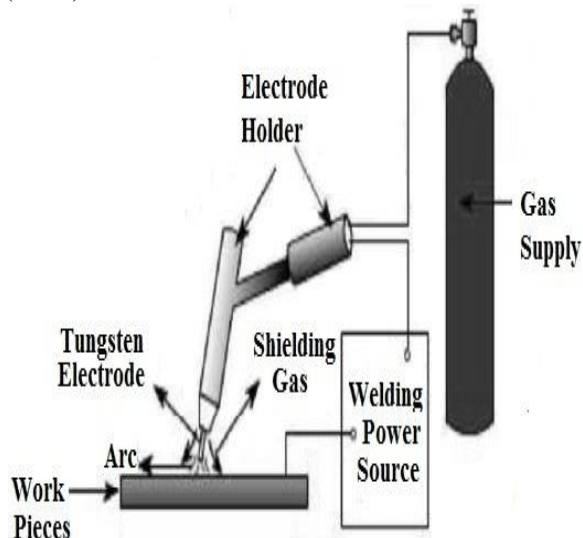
Schematic diagram of TIG welding process^[1]
